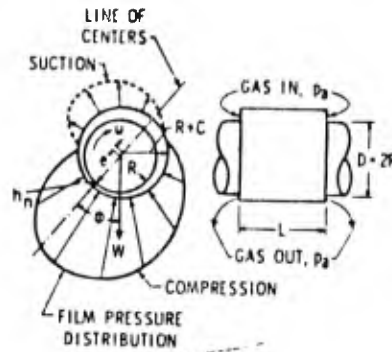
FULL JOURNAL BEARING OR PLAIN CYLINDRICAL BEARING (REF. 8)
